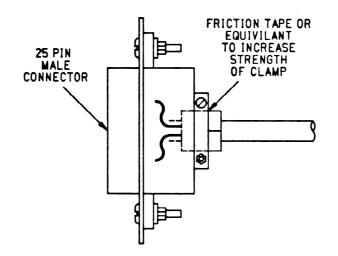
ASSEMBLY OF MATING CONNECTOR
